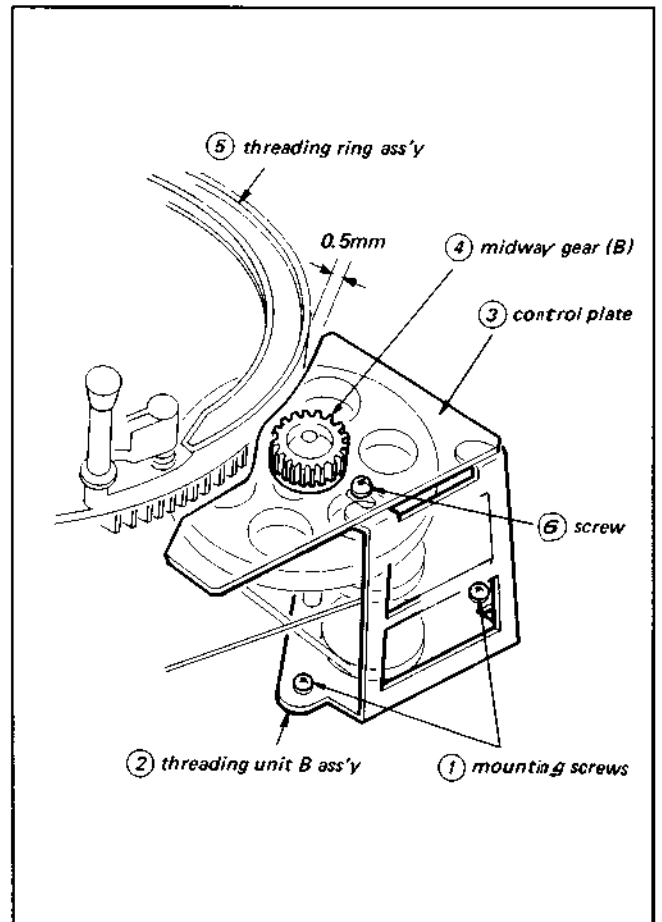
Position adjustment of threading unit B assembly and control plate
